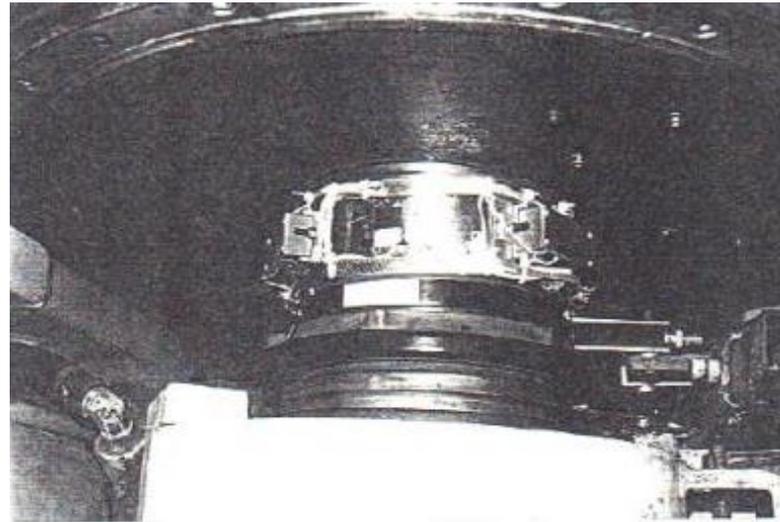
Chill Roll end showing two radio telemetry units fitted, showing transmitter and battery packs, aerials, and receiver probes. The bending and torsional strain gauges are also apparent on the stub shaft.
